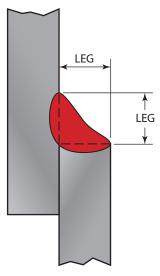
The horizontal lap joint should have a fillet weld that is equal on both plates.
